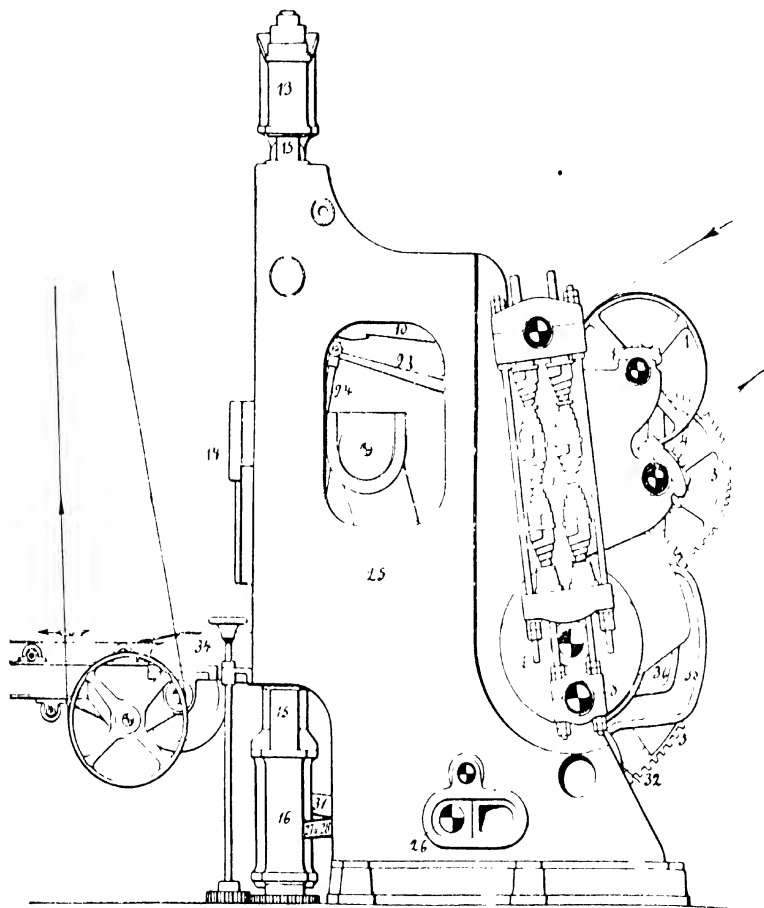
Large Tiegler toggle-joint press, modern type. Side view.
